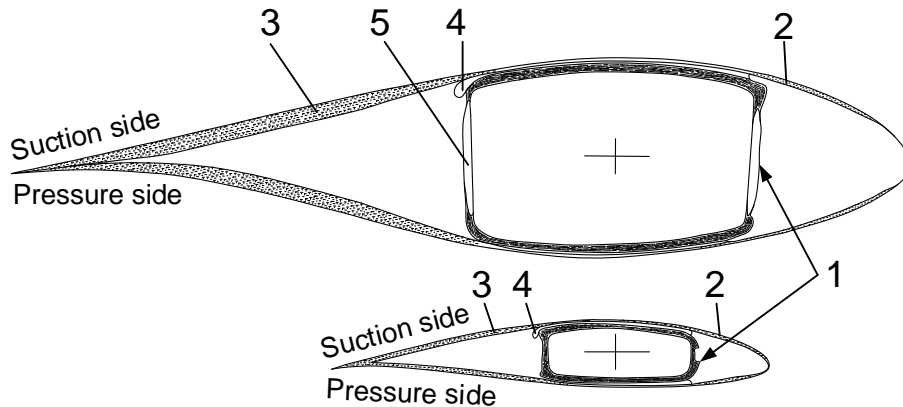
The root and the tip cross-sections of wind turbine blade section. In proportions. 1 – spar, 2 – sandwich structure in the leading edge, 3 – sandwich structure in the trailing edge, 4 – adhesive, 5 – sandwich structure in the spar.
